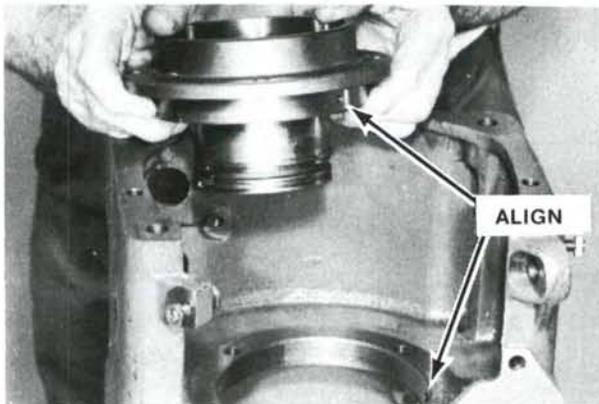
Align lubrication holes in bearing carrier and center carrier as shown during installation. Tighten retaining bolts to 40 N·m (30 ft.-lbs.) torque.
